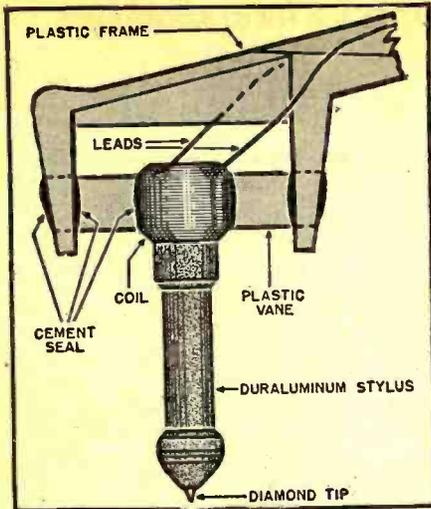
The Fairchild dynamic pickup. Enlarged view shows assembly of unit.
